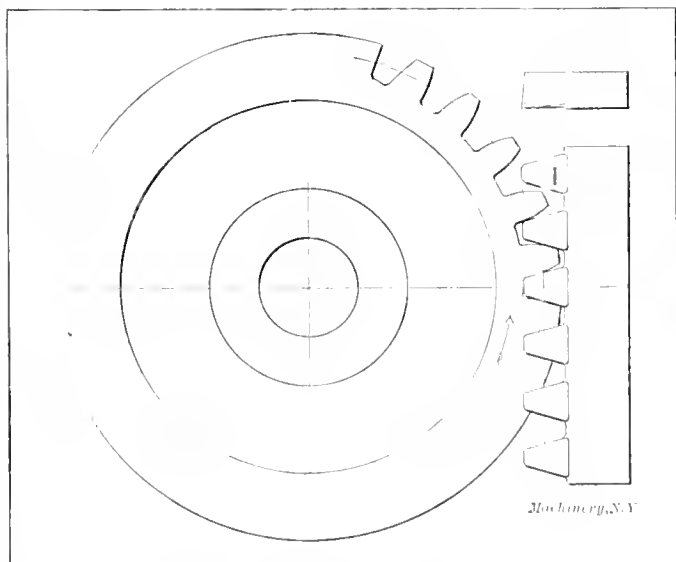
Diagram Showing Action of Rack-cutter in the Sunderland Gear-cutting Machine
